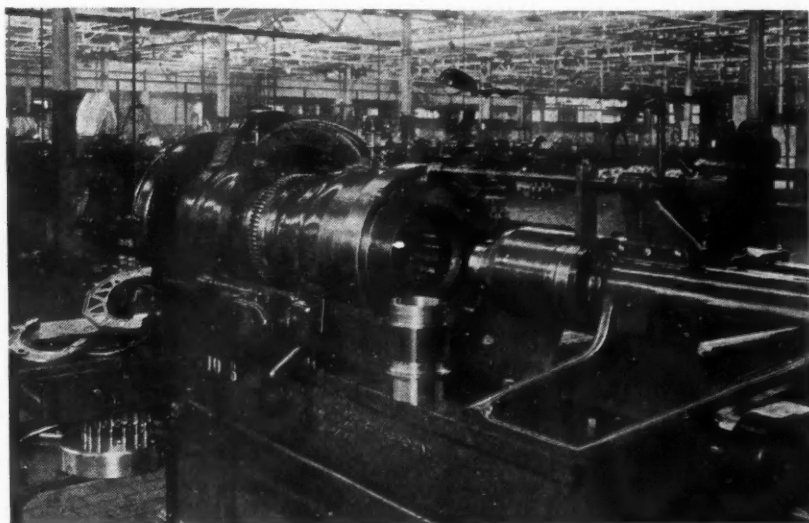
Hall planetary machine for threading cylinder barrels. The work is held concentric by an expansion chuck in the bore. Threads are milled by a series of tools that rotate and move forward according to pitch. At completion of the cycle, the machine automatically reverses. Similar machines of an internal type hob the mating thread in the cylinder head.
